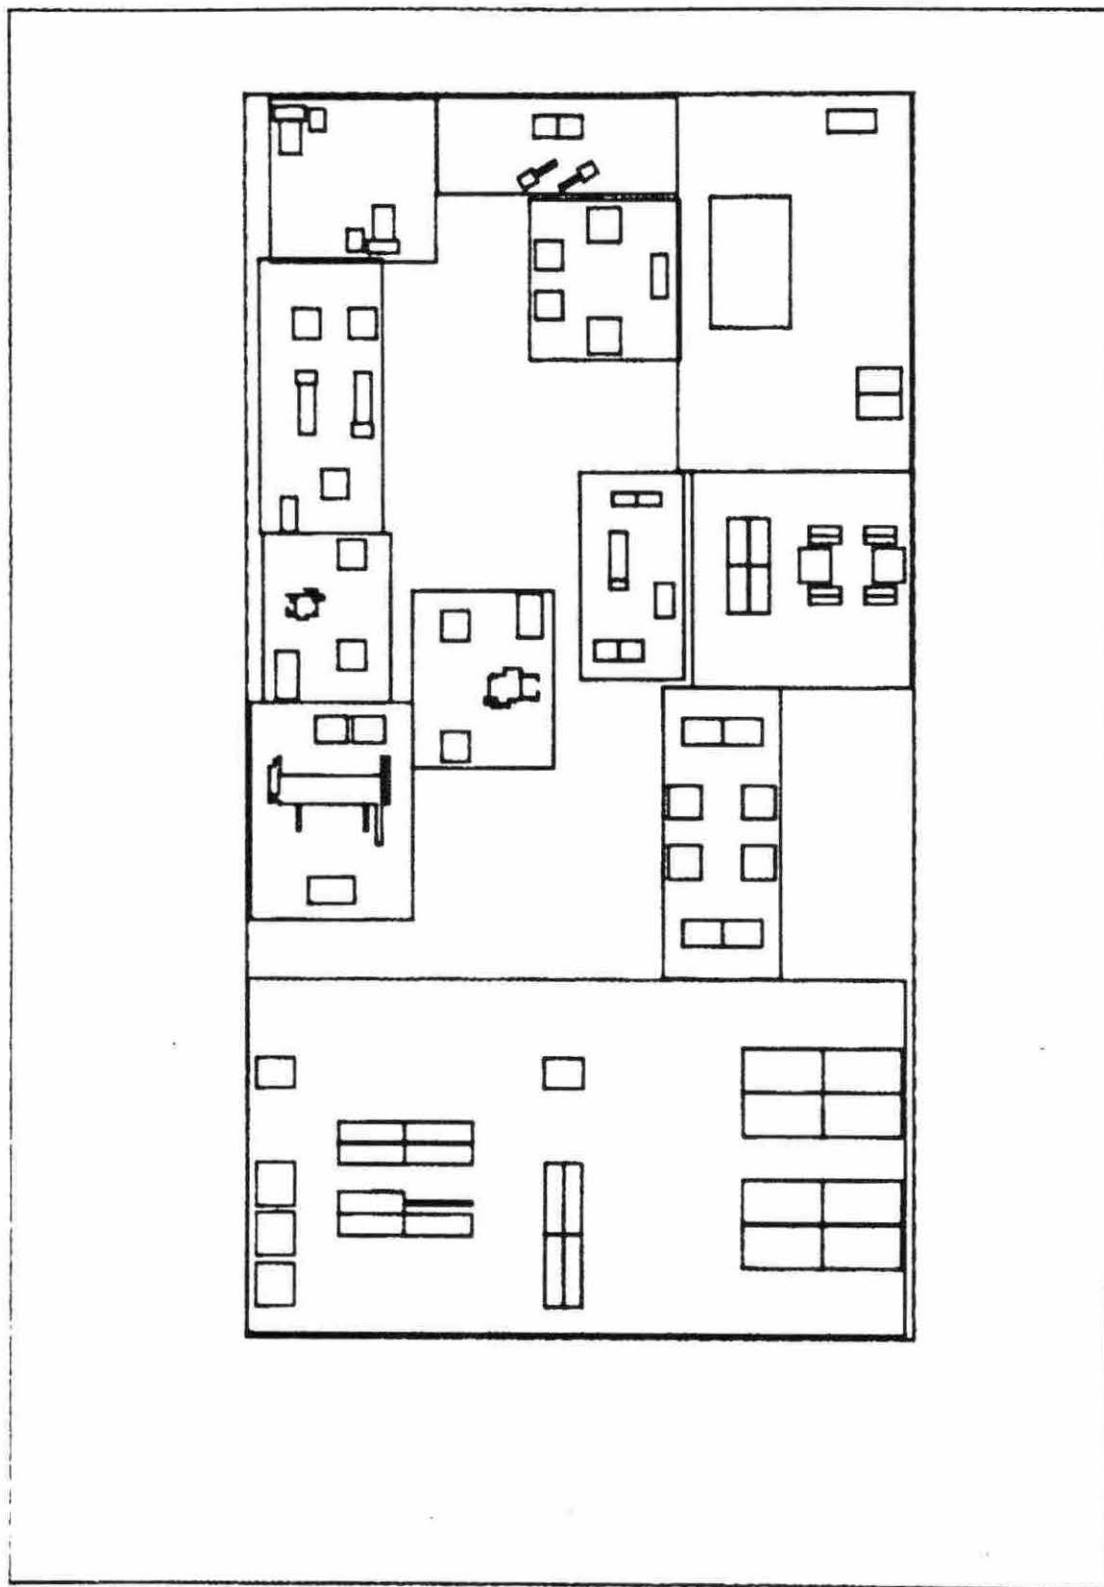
Ronko Manufacturing Company FLAY layout - improved version
